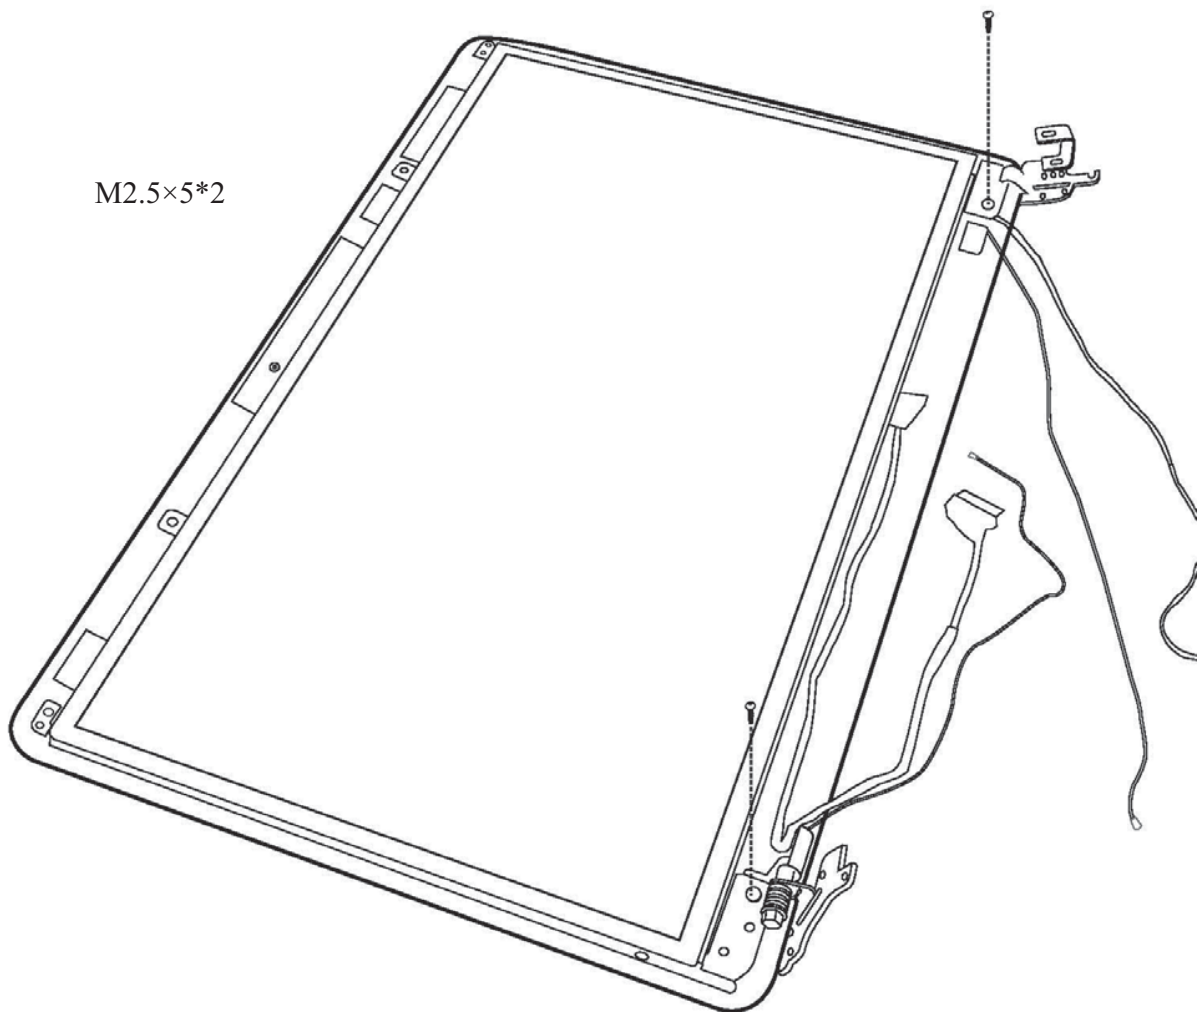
Removing the LCD Module from the LCD cover assembly
